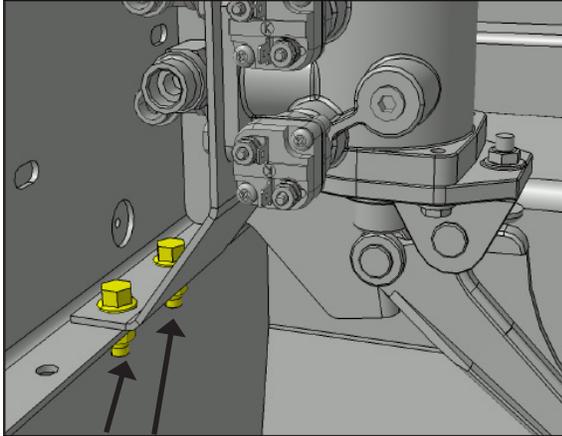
Remove the two sets of 3/8" bolts and nuts from the bottom of the treadle valve.
